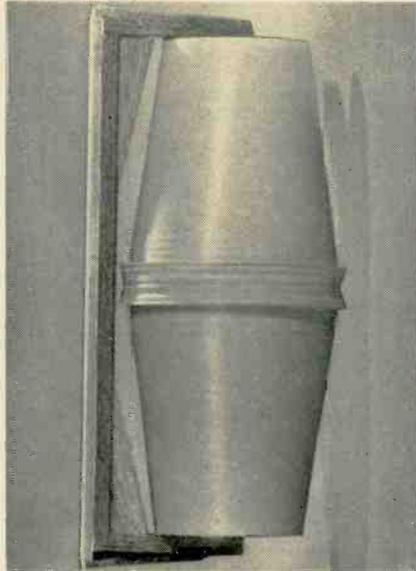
Front roller is mounted beneath the movable yoke, using two eyelet bearings and a piece of coathanger wire. Unit functions as the steerable roller axle.
